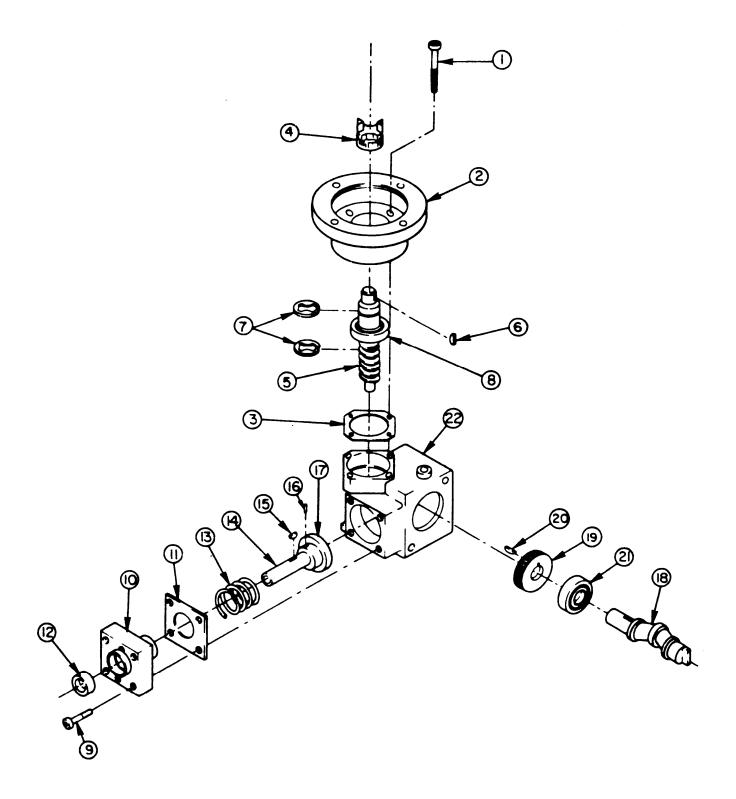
Chemical Feed Pump Block Assembly (ARMY)
